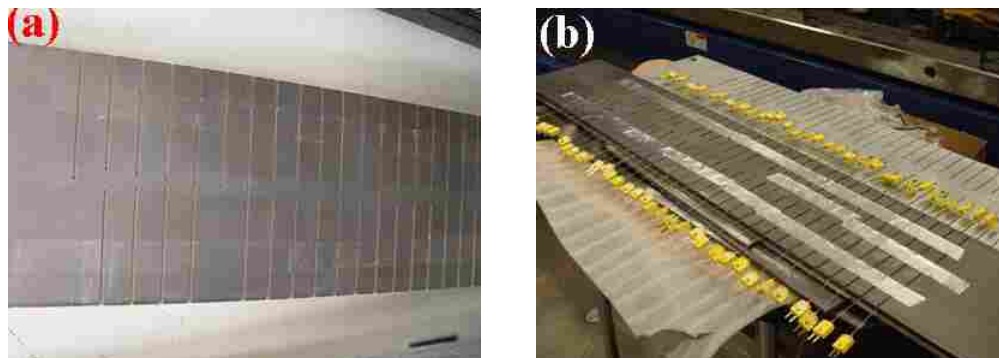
(a) The backing plate (b) The backing plate with the thermocouples
